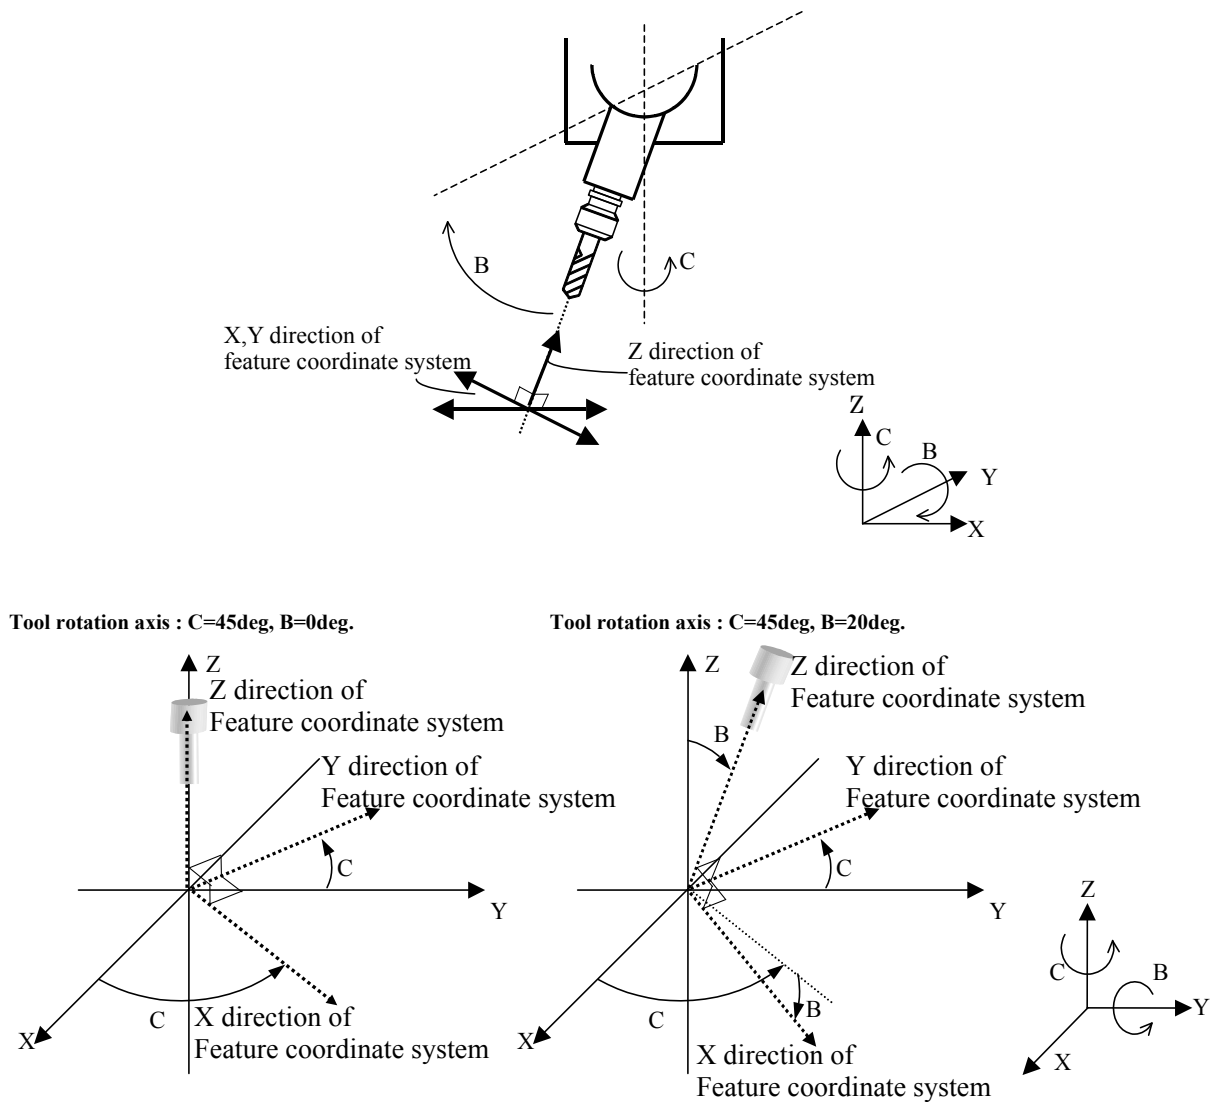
(e) Example that reference tool axis direction is Z direction
